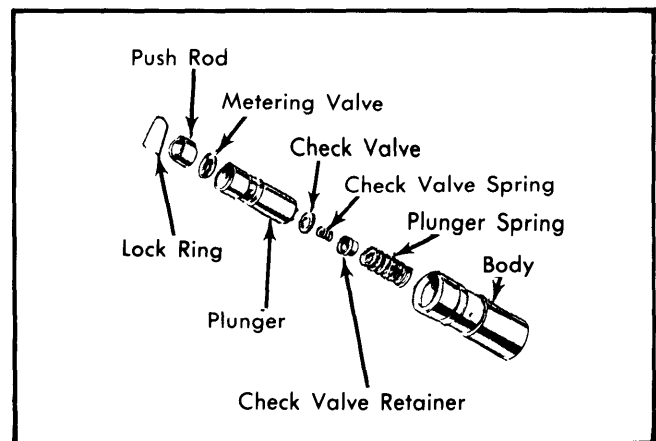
Disassembled View of Hydraulic Valve Lifter
